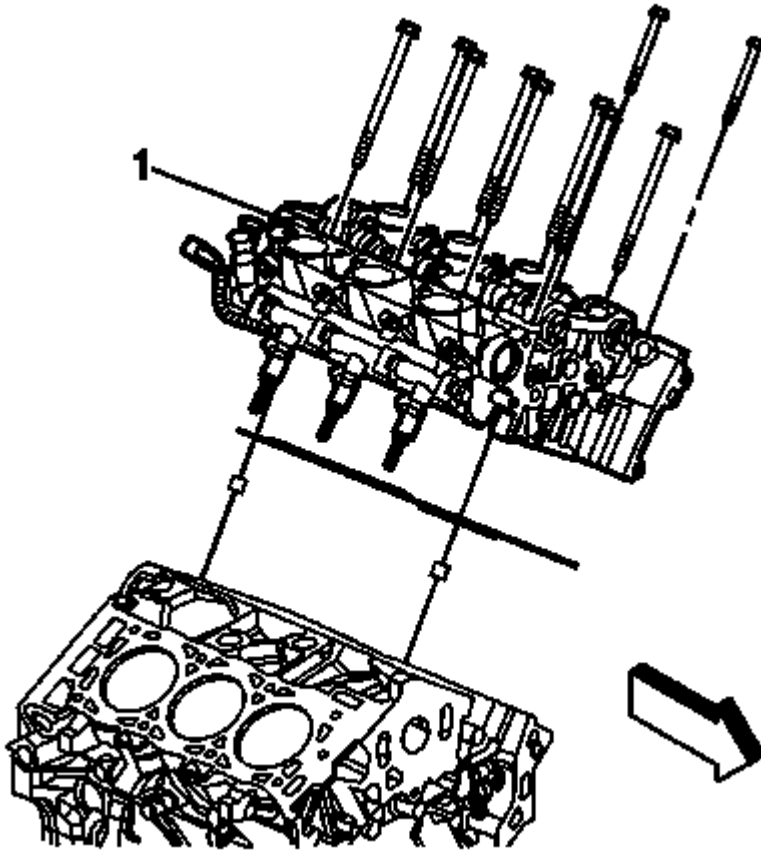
Identifying Cylinder Head and Exhaust Manifold Assembly
